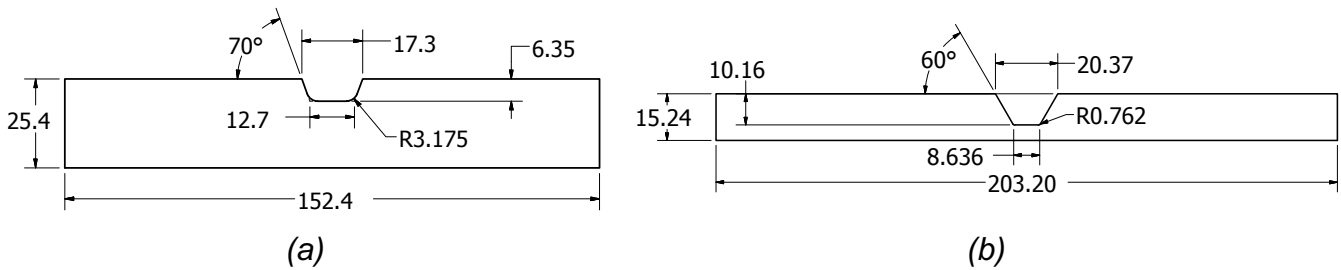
Dimensioned diagrams of plate cross-section with details of the machined weld groove used in (a) this work and (b) NRC/EPRI Phase I. Dimensions in mm
